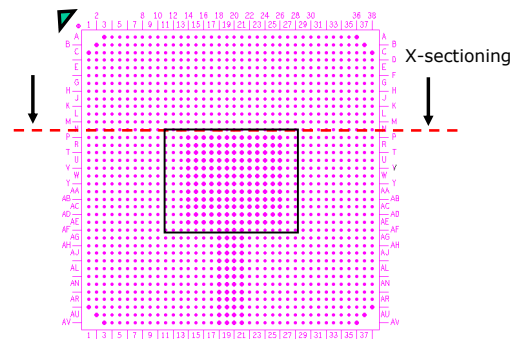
FCBGA solder ball layout and the location of cross-section (the center box denotes die area)
